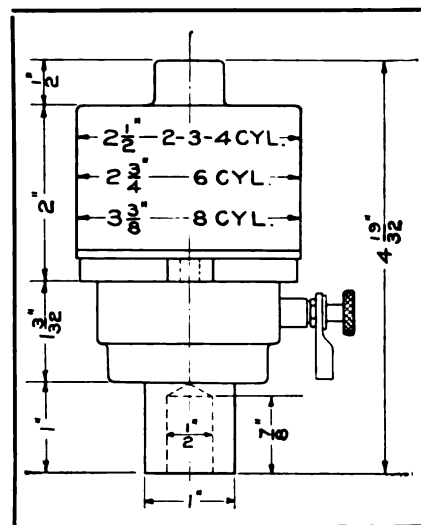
Diagram Giving Dimensions of Combined Igniter and Distributor.
